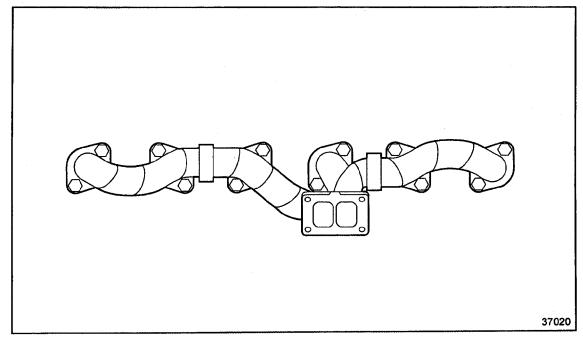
Typical Exhaust Manifold of a Pleasure Craft Marine
